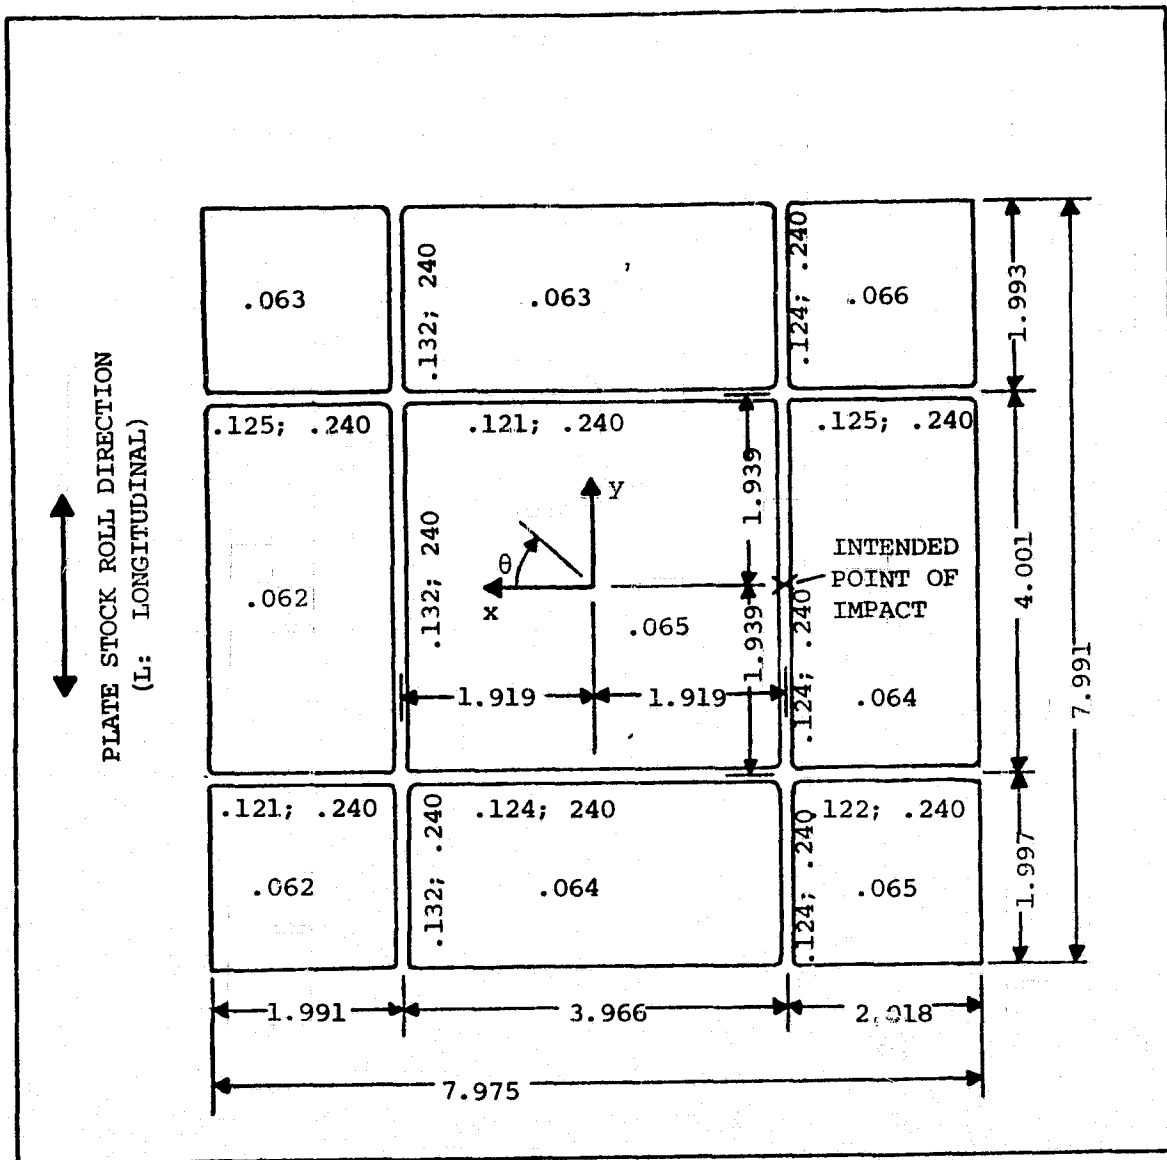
DIMENSIONS AND NOMENCLATURE OF INTEGRALLY-STIFFENED 6061-T651 PANEL MODEL SCP-1
